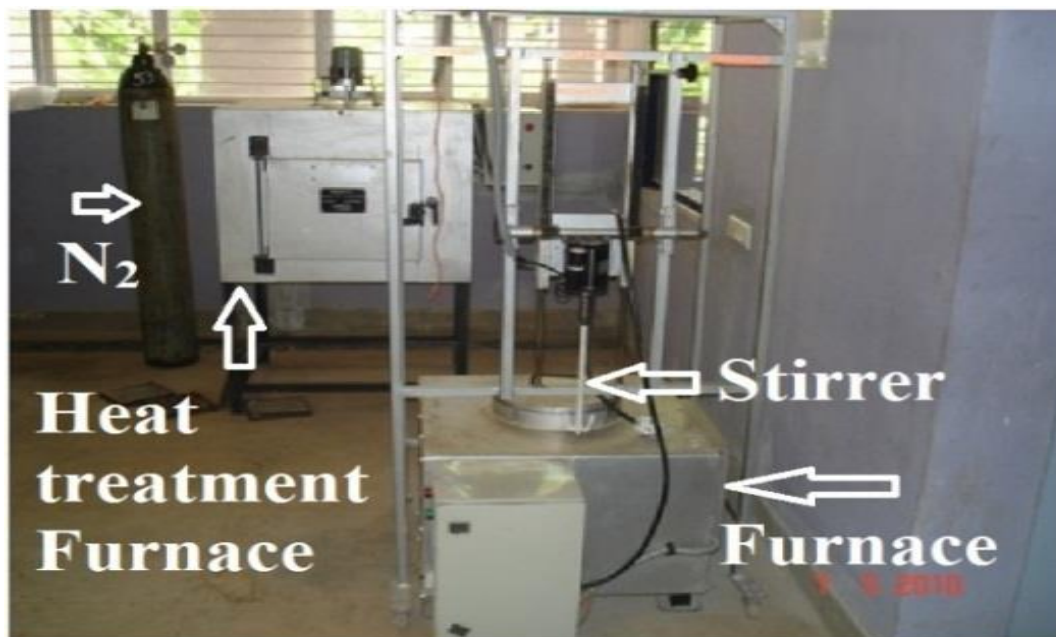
The Photograph of stir casting setup used to prepare AA6061-SiC composites
